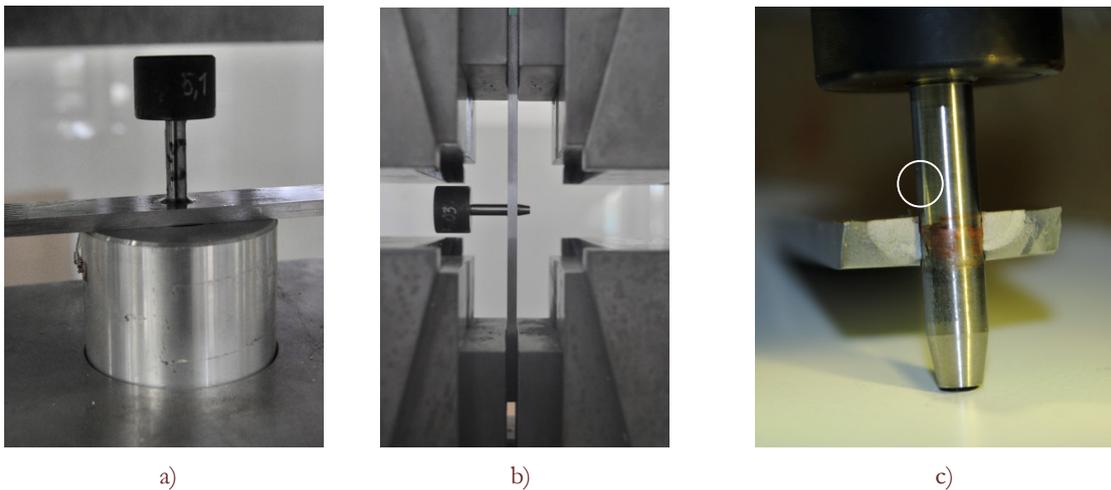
Pin insertion, specimen lock system and fracture surface.
